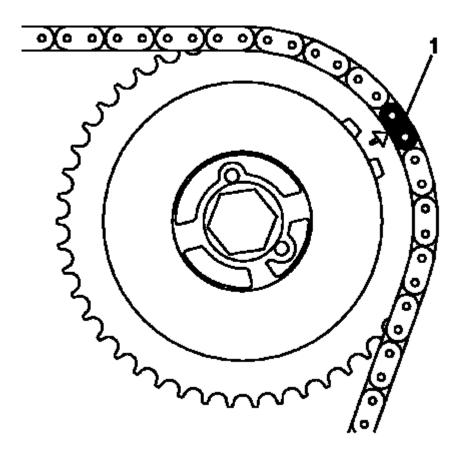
Timing Chain & Camshaft Bearing Cover Marks
